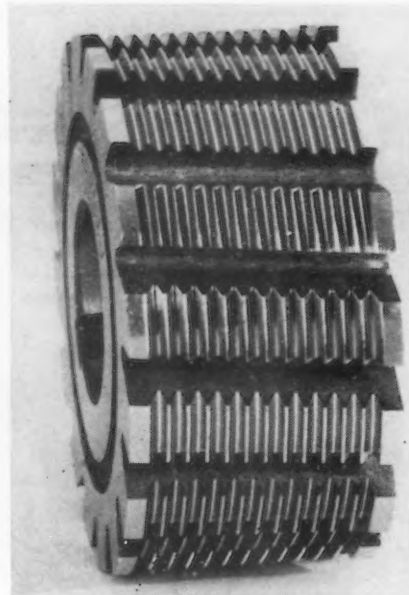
Shell type Buttress thread milling cutter which has flat portions at each end for removing the "feather edge" produced at the ends of threaded sections. Photo courtesy of Detroit Tap & Tool Co.
